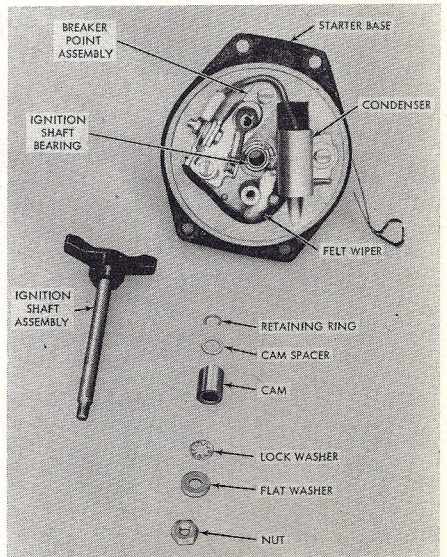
A — Partly disassembled view of BP-1 ignition breaker assembly.
